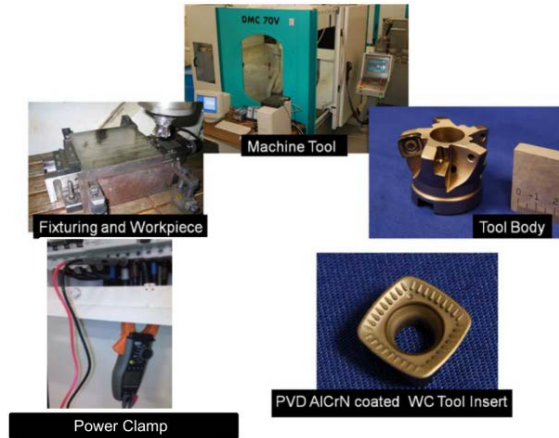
Experimental set-up. Machine-tool, cutting-tool, fixture, workpiece and power clamp.
